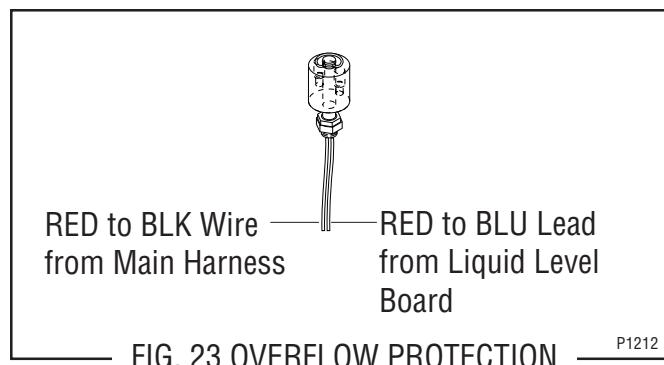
OVERFLOW PROTECTION SWITCH LEADS P1212
